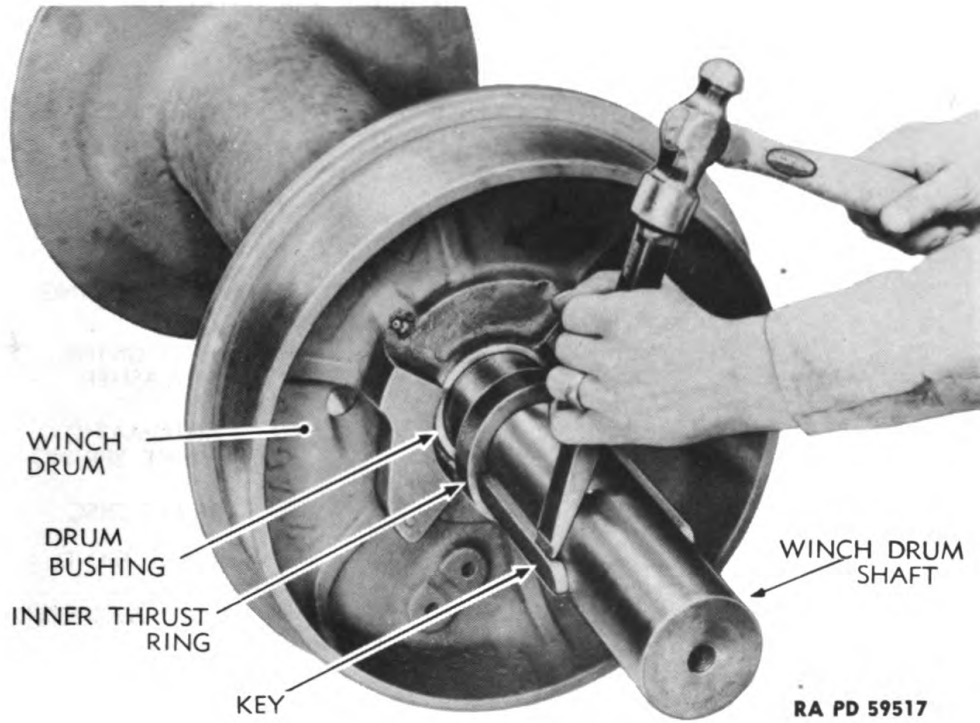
Removing Drum Shaft Keys from Drum Shaft
